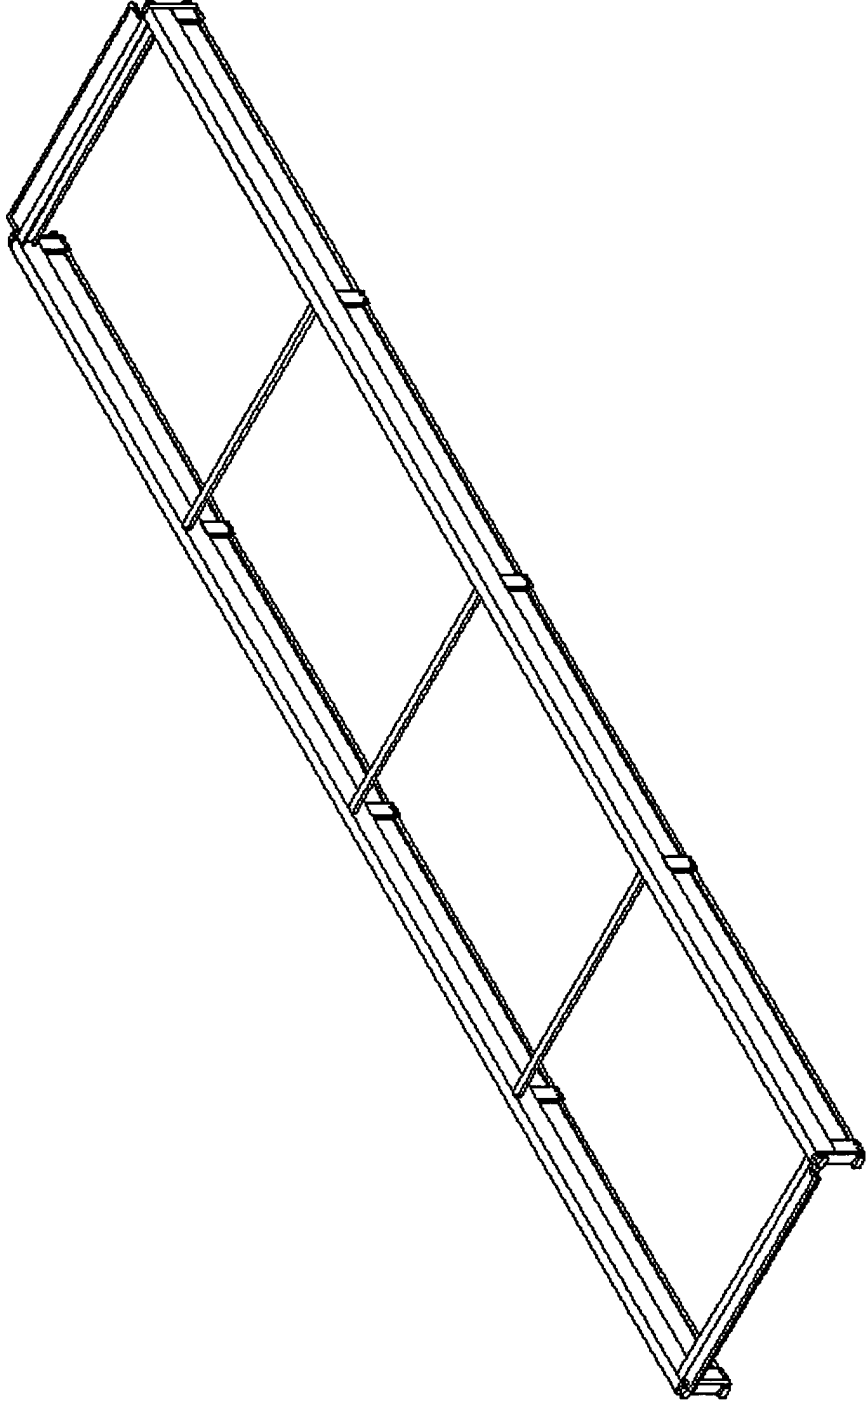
B: Isometric view of a ceiling frame (40 foot high cube collapsible cargo container)
